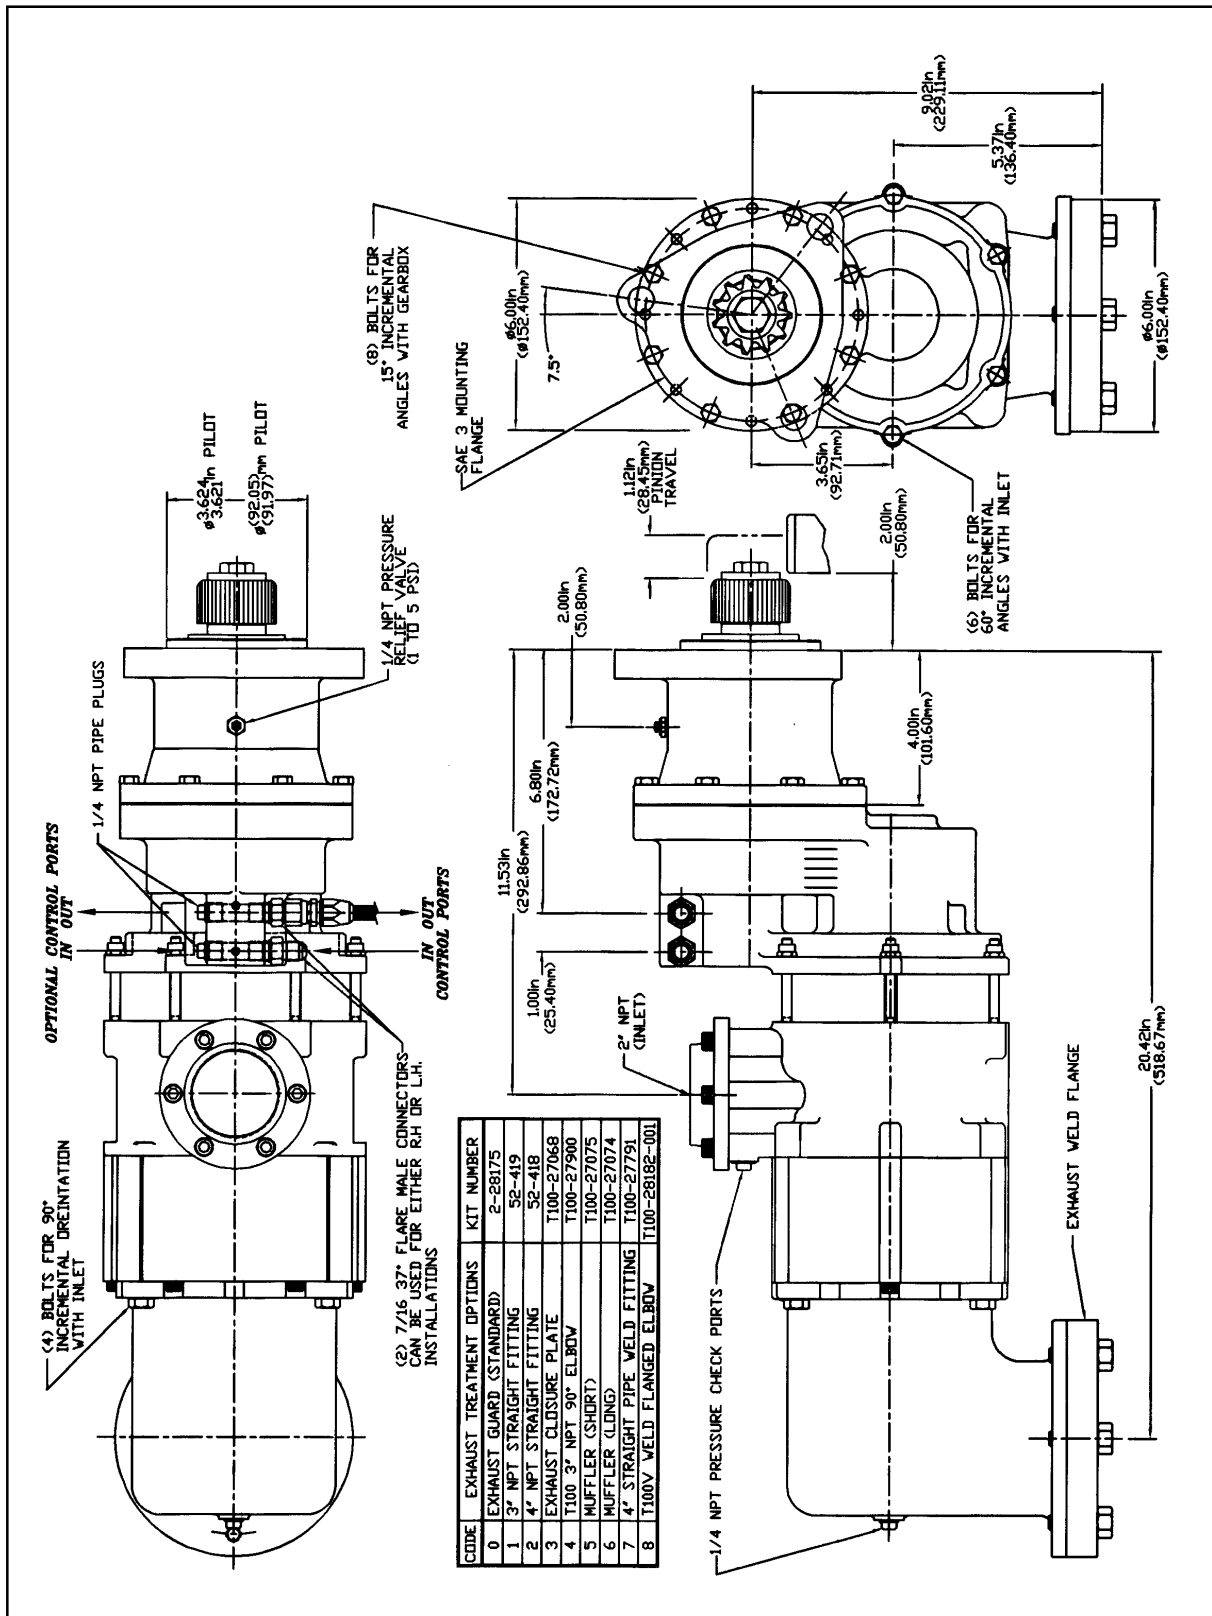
T100-V TURBOTWIN Air Starter with Flanged Exhaust Elbow
